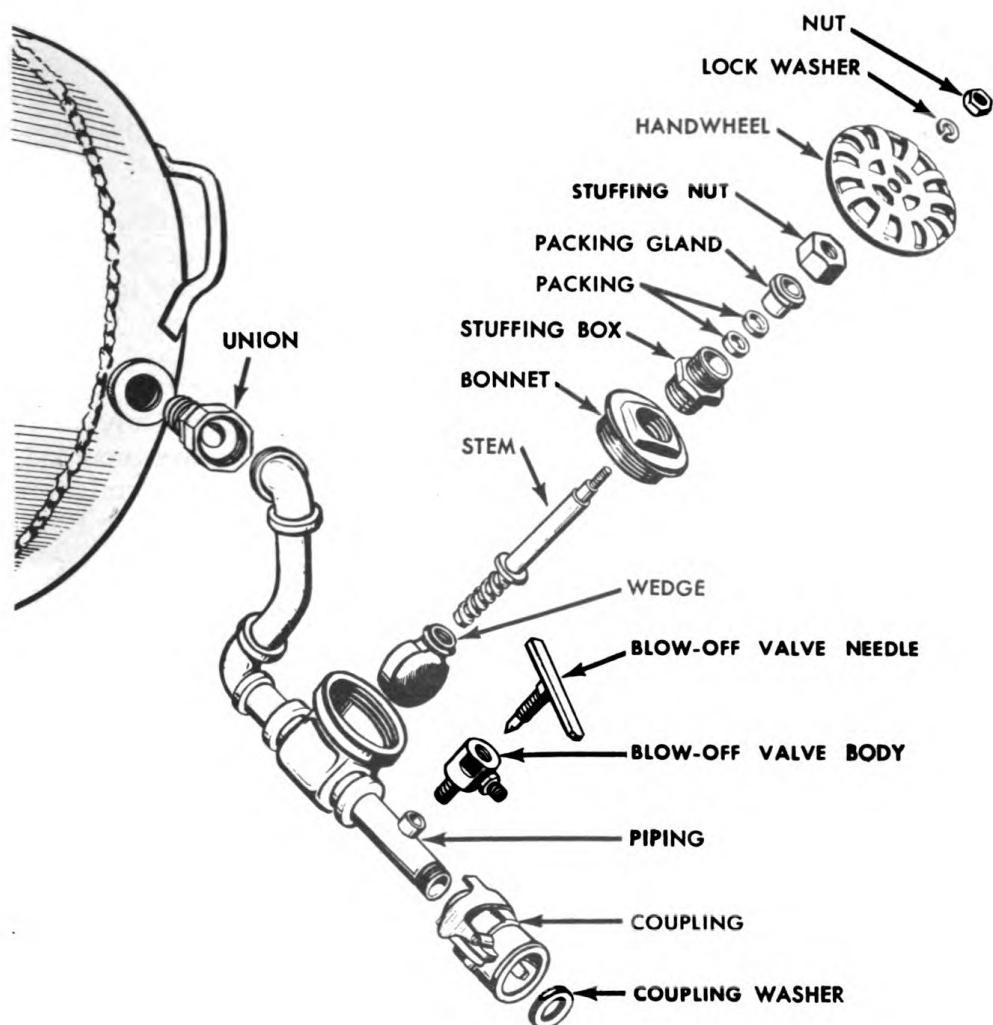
Fuel outlet piping. (Exploded view of fuel container valve and blow-off valve.)
